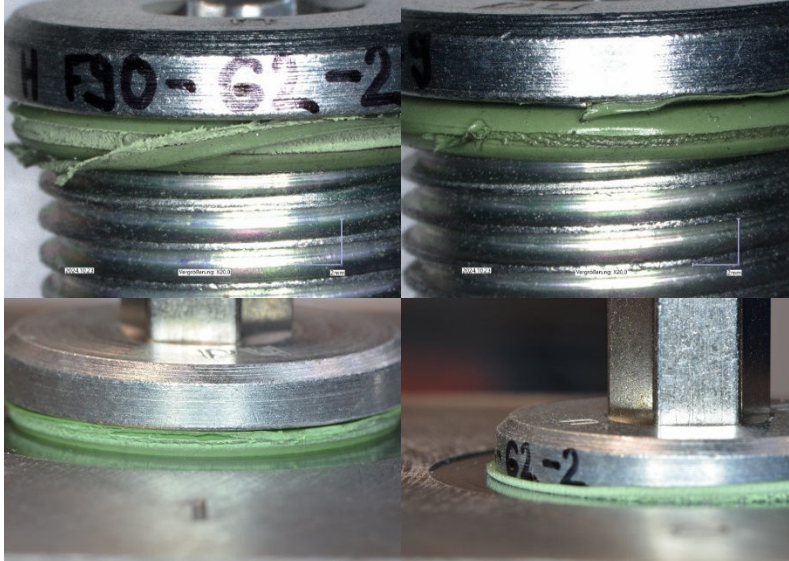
Photographs of damaged FKM90 O-rings (series production conditions)
